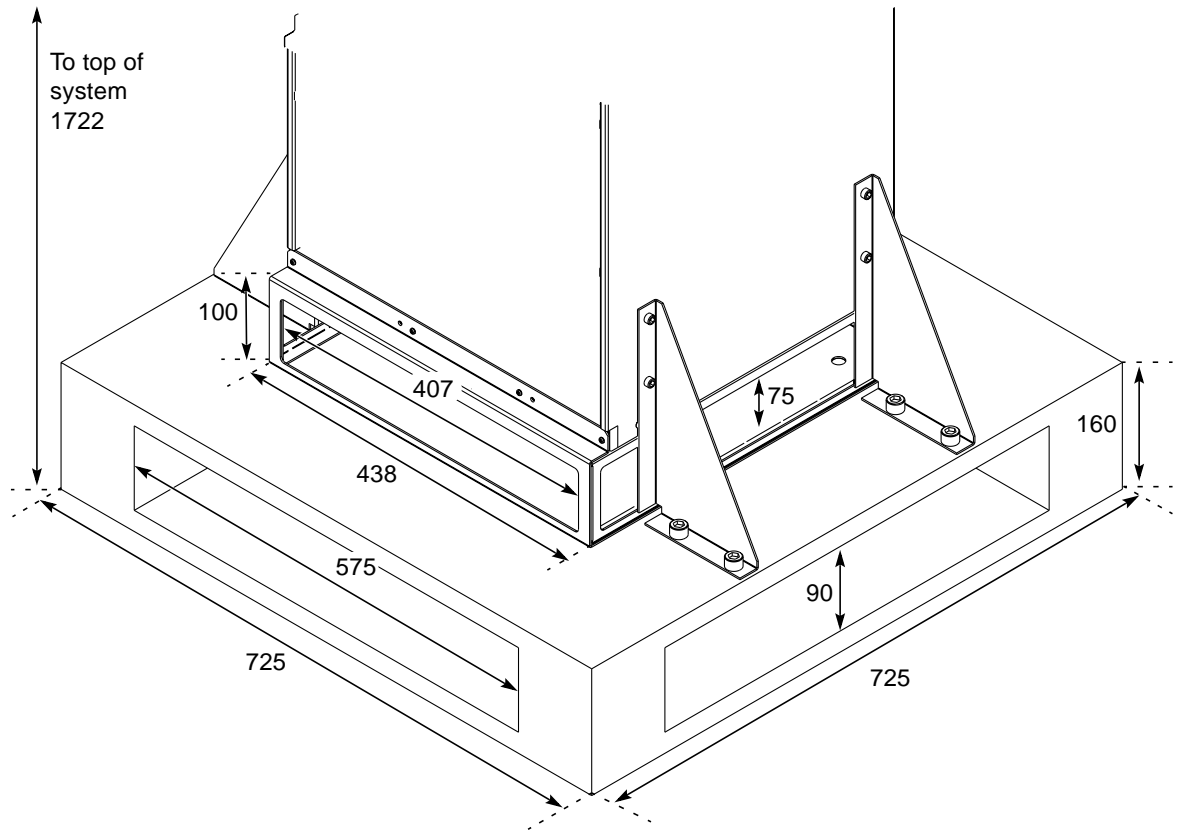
Shipping Pallet and Mounting Plinth Dimensions (millimeters)
